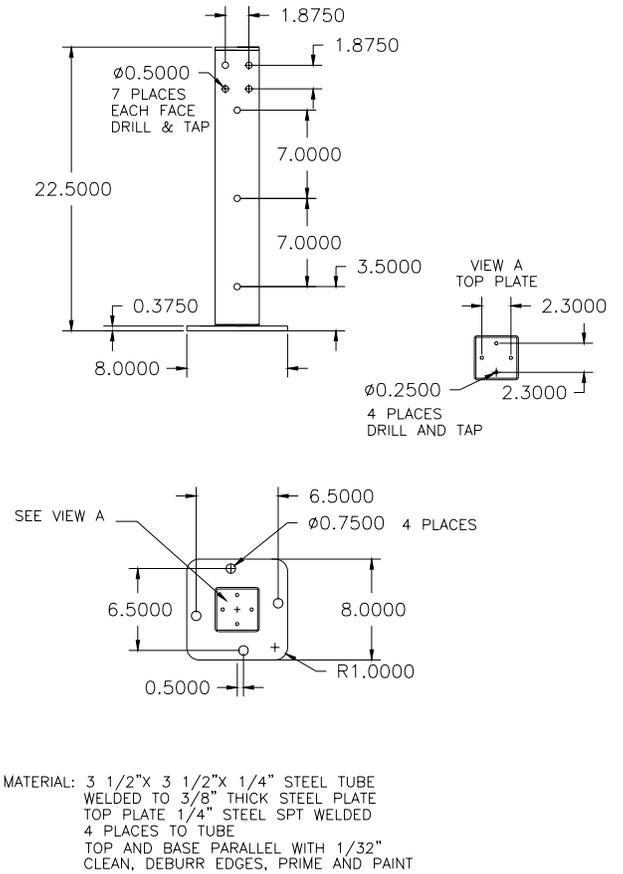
C – Heavy Duty Stanchion – 24 Inch Tall Floor
